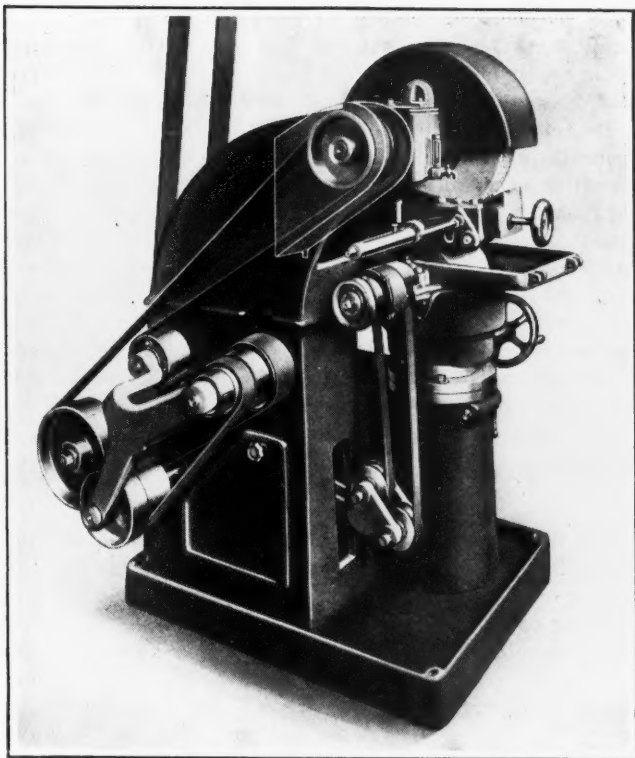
Heavy-duty Centerless Grinder made by the Detroit Machine Tool Co.
